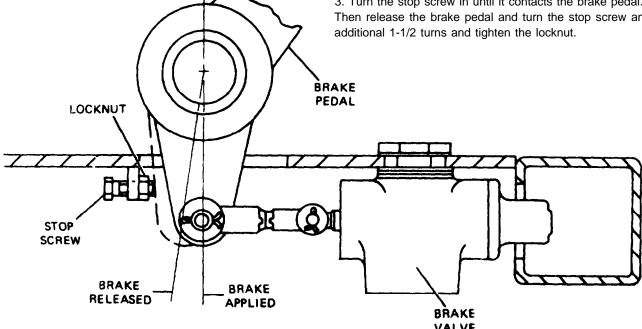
F-2. Brake Pedal Stop Adjustment (100J4194-1-A)
